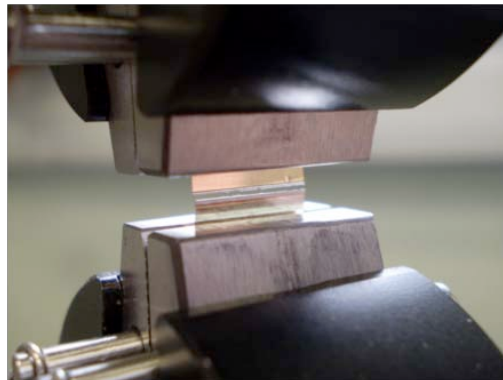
Close-up view of a tested sample (the weld in the center).
